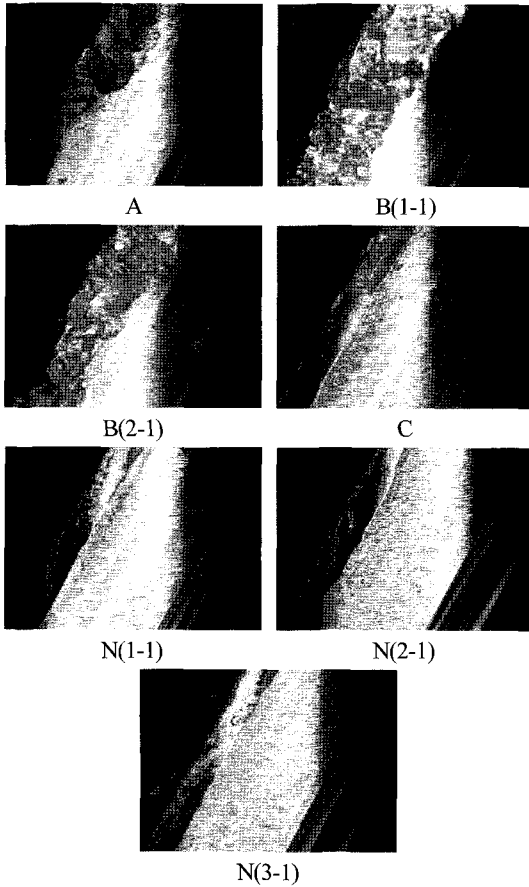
Flank wear pattern according to cutting length by CCD(14,000rpm)
